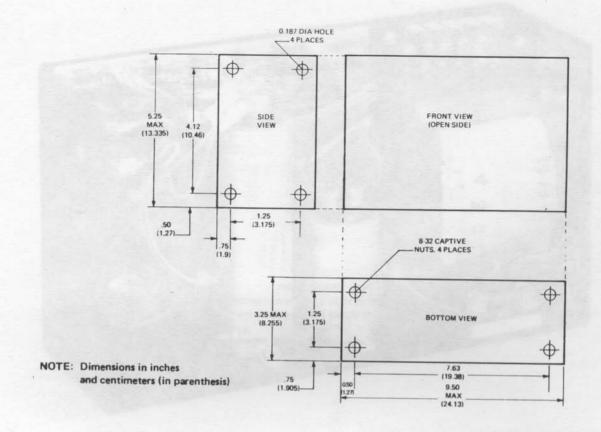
MOUNTING DIMENSIONS (IN INCHES)
